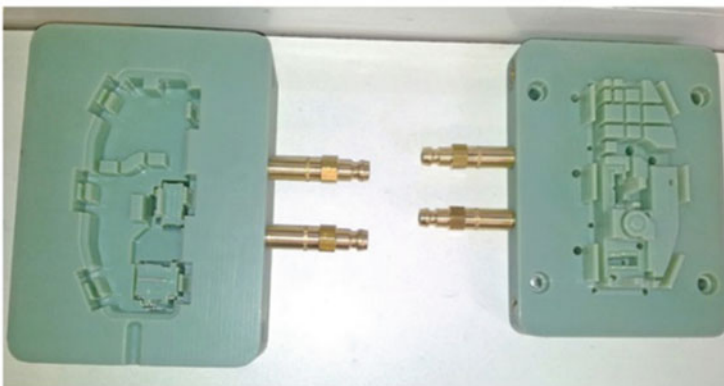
Moulded part ejection system (Courtesy of Stratasys)
